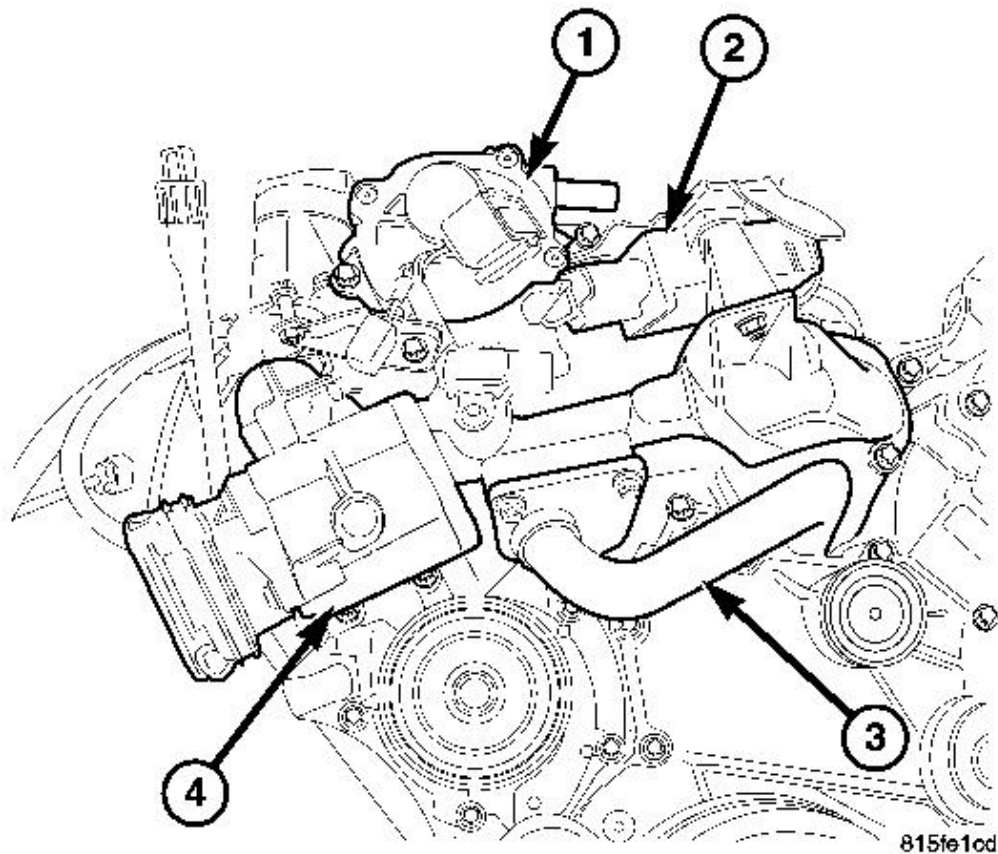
Vacuum Pump, Glow Plug Relay, EGR Cooler & Air Control Valve
